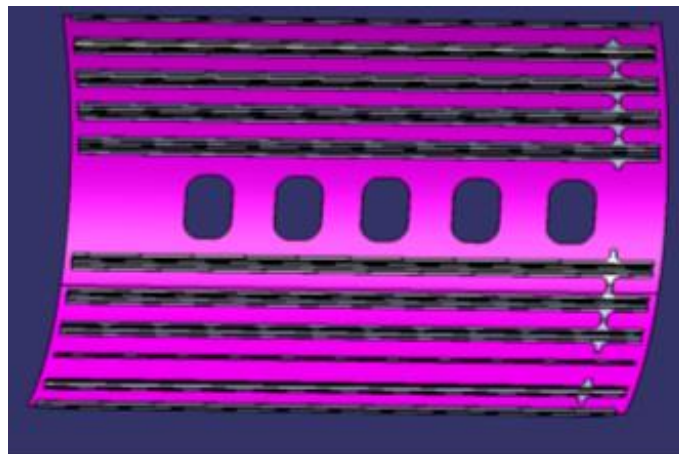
Generic stiffened before frame/ shear tie clips installation
